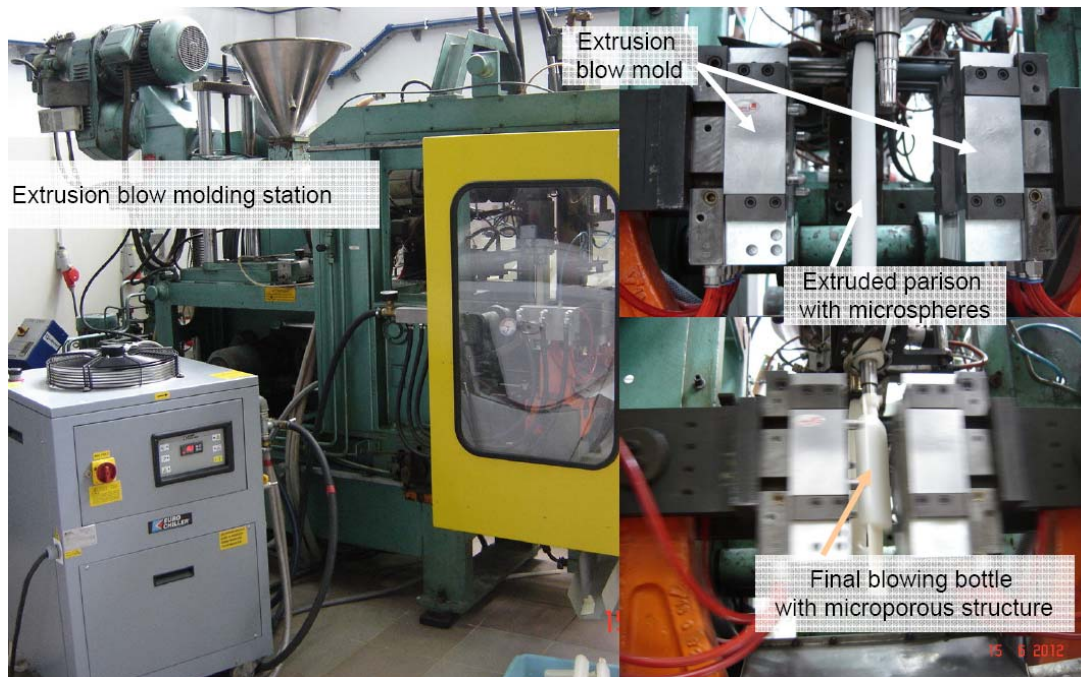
Extrusion blow molding machine to realizing MM-EBM process
